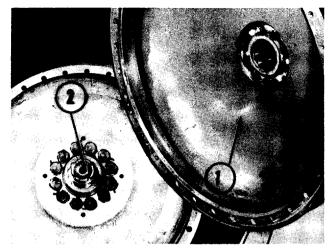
Removing Capscrews Securing Pump Cover to Pump
